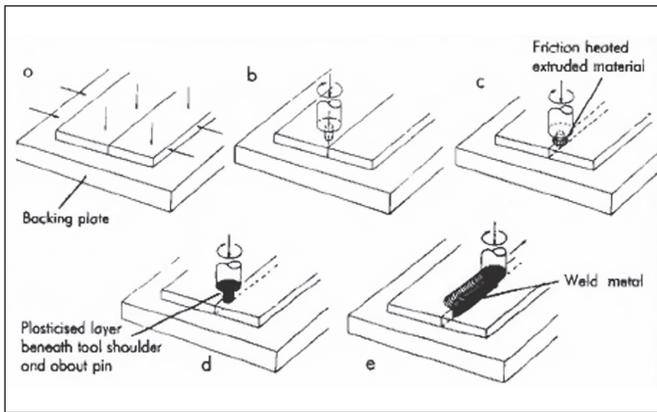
Schematic of the friction stir welding operation. A — The parts to be joined are clamped to a backing plate; B — a cylindrical-shouldered tool with a special pin profile is positioned with its axis on the joint centerline; C — the tool is rotated at a certain peripheral velocity and plunged into the joint; D — plasticized metal, through friction heating, is removed until the tool shoulder is in intimate contact with the work surface; E — when the tool is moved against the work, or vice versa, plasticized material is moved from the front to the back of the pin thus forming a weld on consolidation as the pin, and the heat source, move away.
